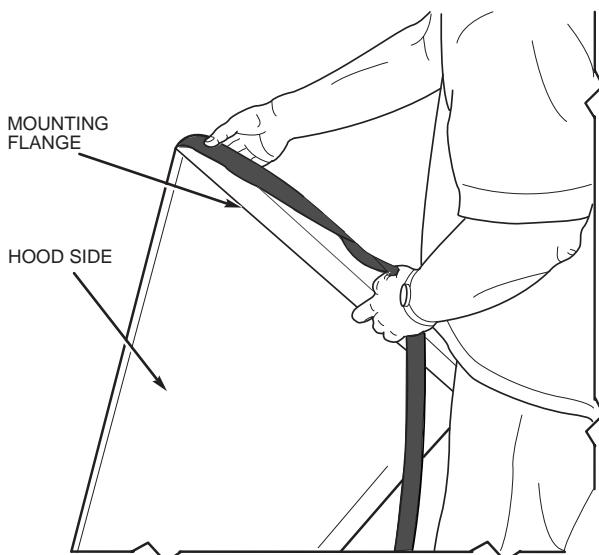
Adding Seal Strip to Mounting Flange of Hood Sides
